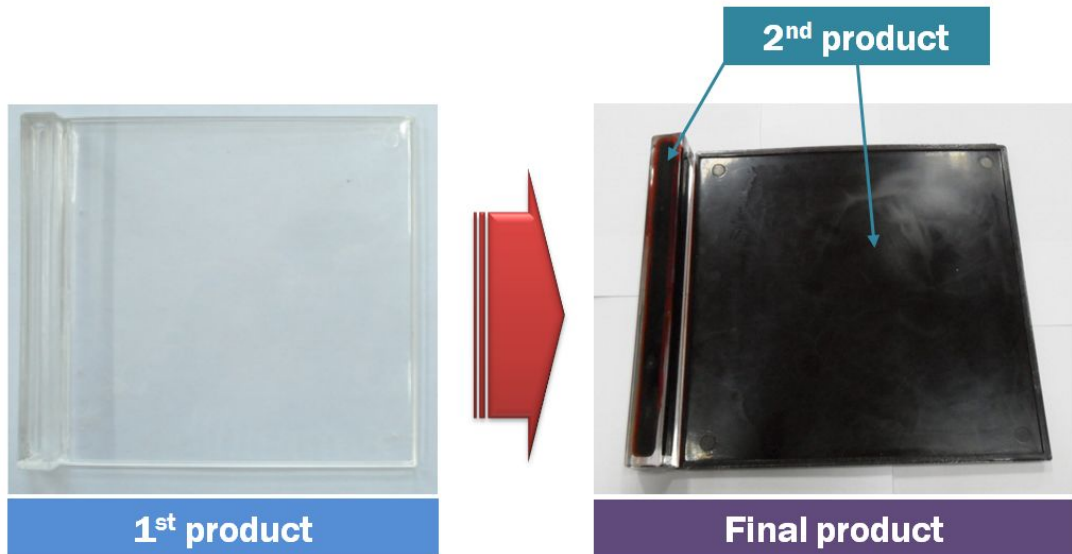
Finally manufactured a plastic flat plate with a partly large volume from the multi-sliced double shot injection mould
